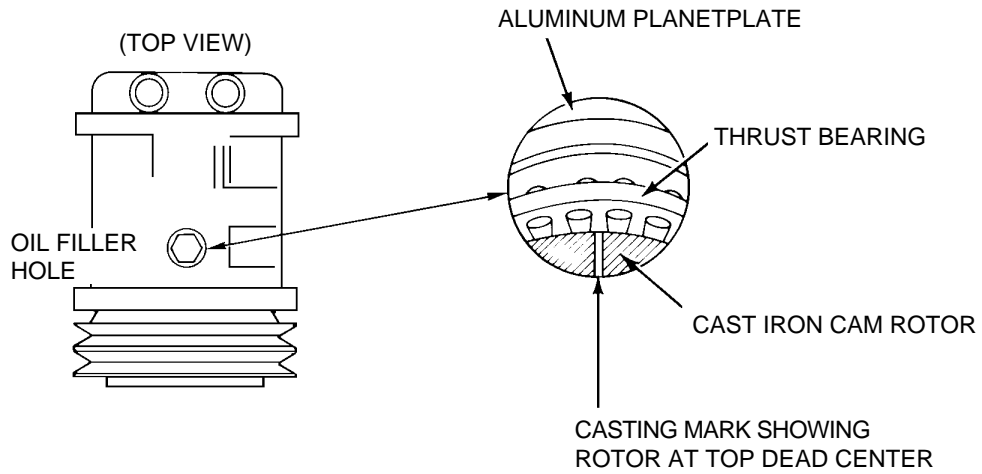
Top Dead Center Casting Mark (Sankyo Compressor)
